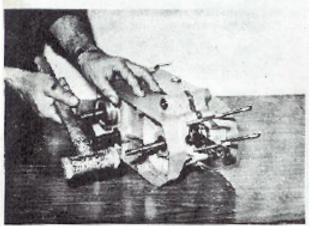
Holding the pedal and the crankshafts, remove the righthand housing. If the housing will not come off, using a soft head mallet tap the 3 shafts to break the seal.
